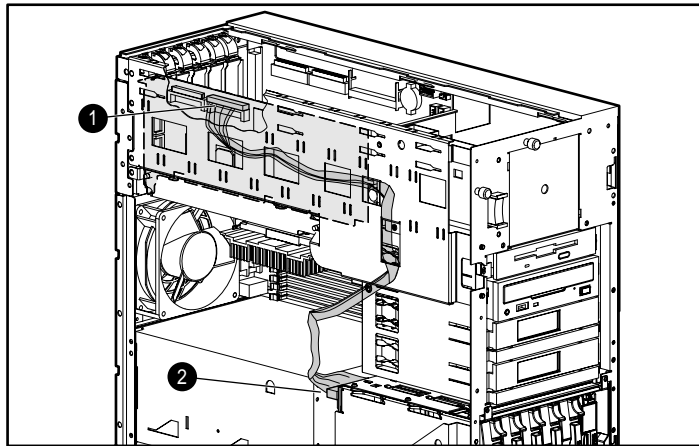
Connecting a controller board to the hot-plug drive cage
